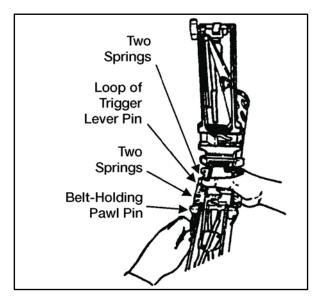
Removal of the belt holding pawl pin, assembly, and springs
